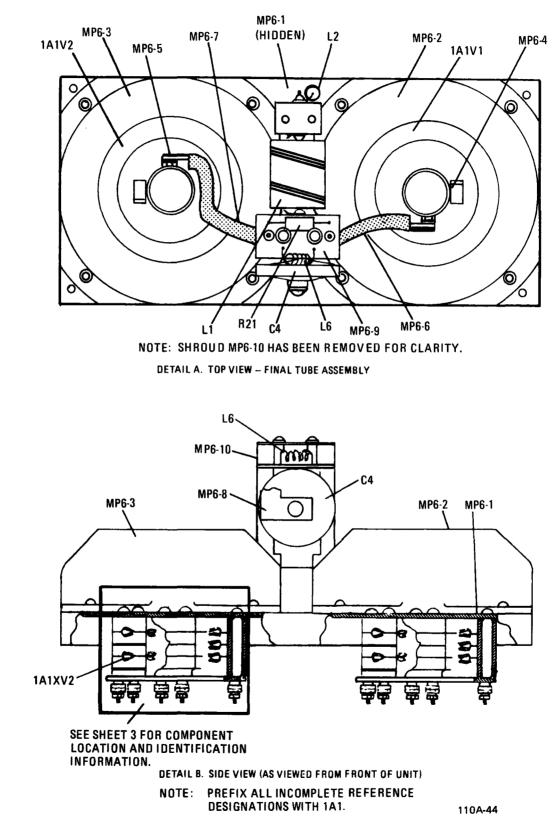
Final Tube Assembly 1A1MP6, Part No. 8948-3470, Component Locations (Sheet 1 of 3)
